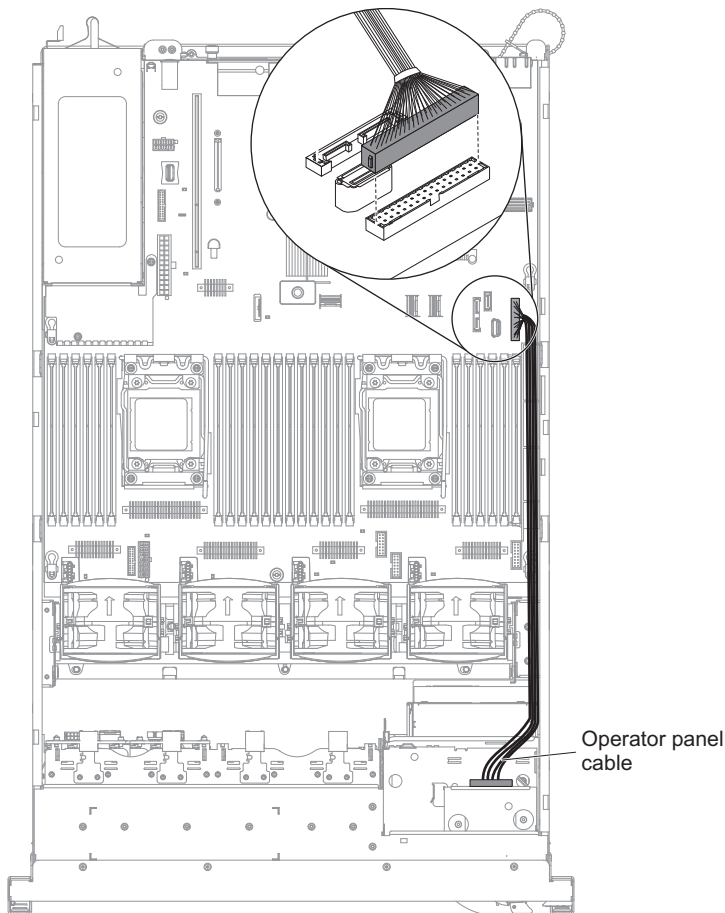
Connecting the 2145-DH8 operator-information panel cable
